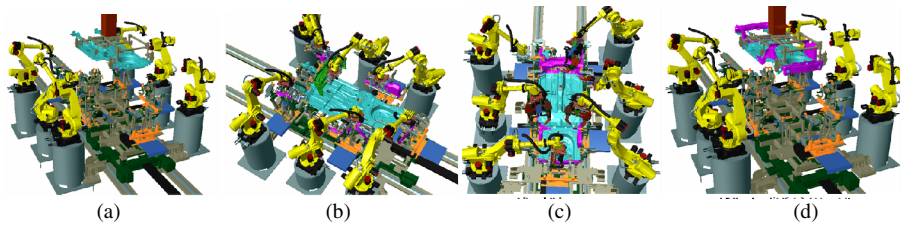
(a) The work piece is transported to robot welding station by overhead system; (b) The robot fixing sub-floor assembly; (c) The robot welding in welding station; (d) The work piece is transported to next robot welding station by overhead system
